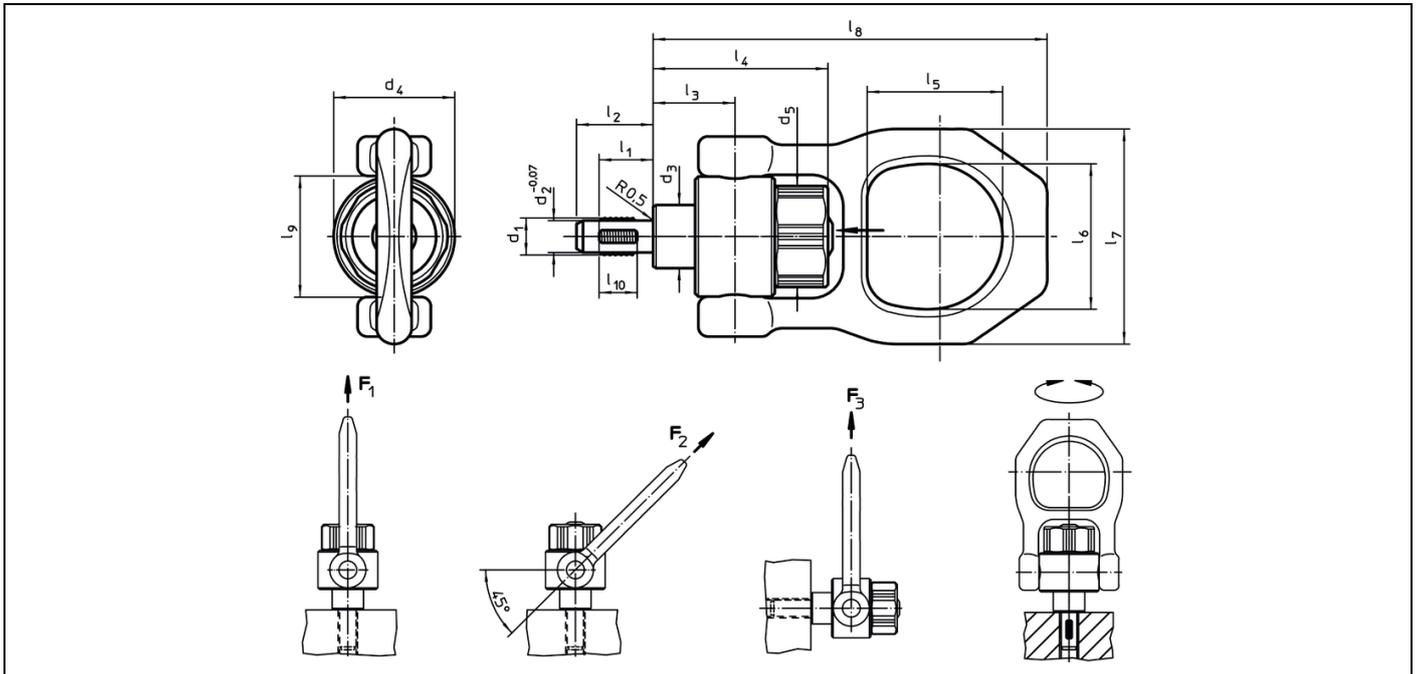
Dimensioned drawing - threaded lifting pins, self-locking, with rotatable shackle - EH 22353
